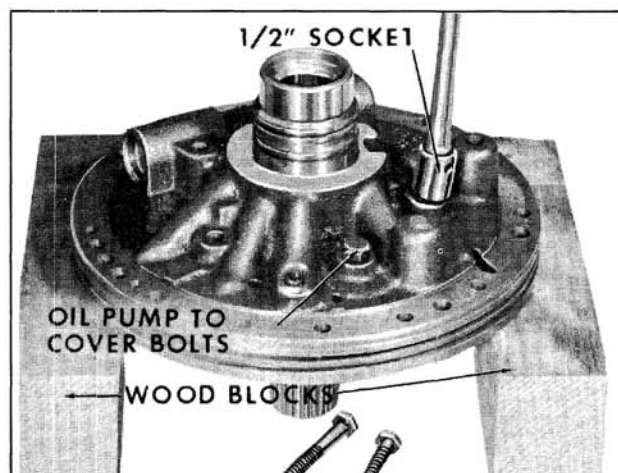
Removing Oil Pump Cover Attaching Bolts
